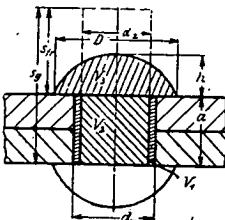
Division of rivets for computing the desired lengths of rivet body.
